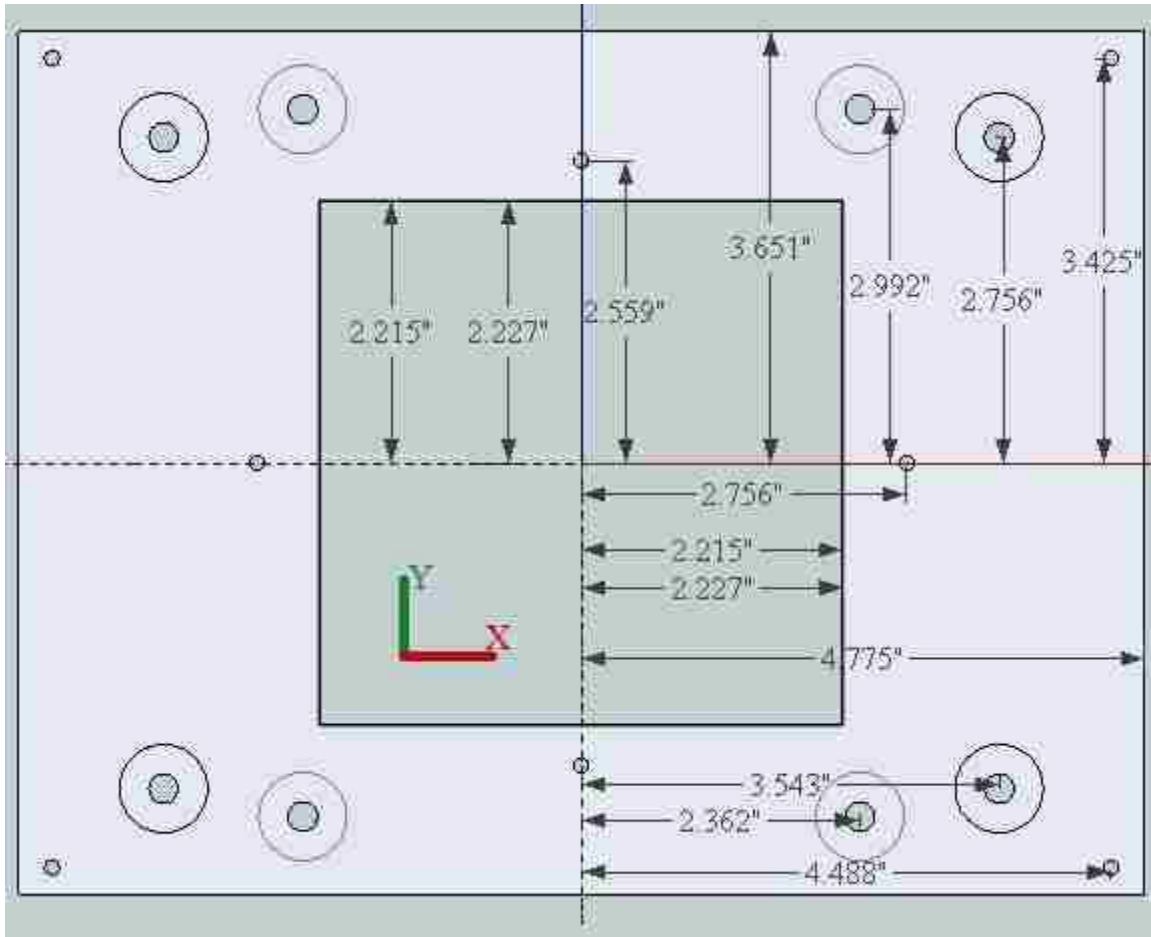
Top view of the 10x10 cm² upper trimmer aluminum plate illustrating the in-plane and cross-plane dimensions.
